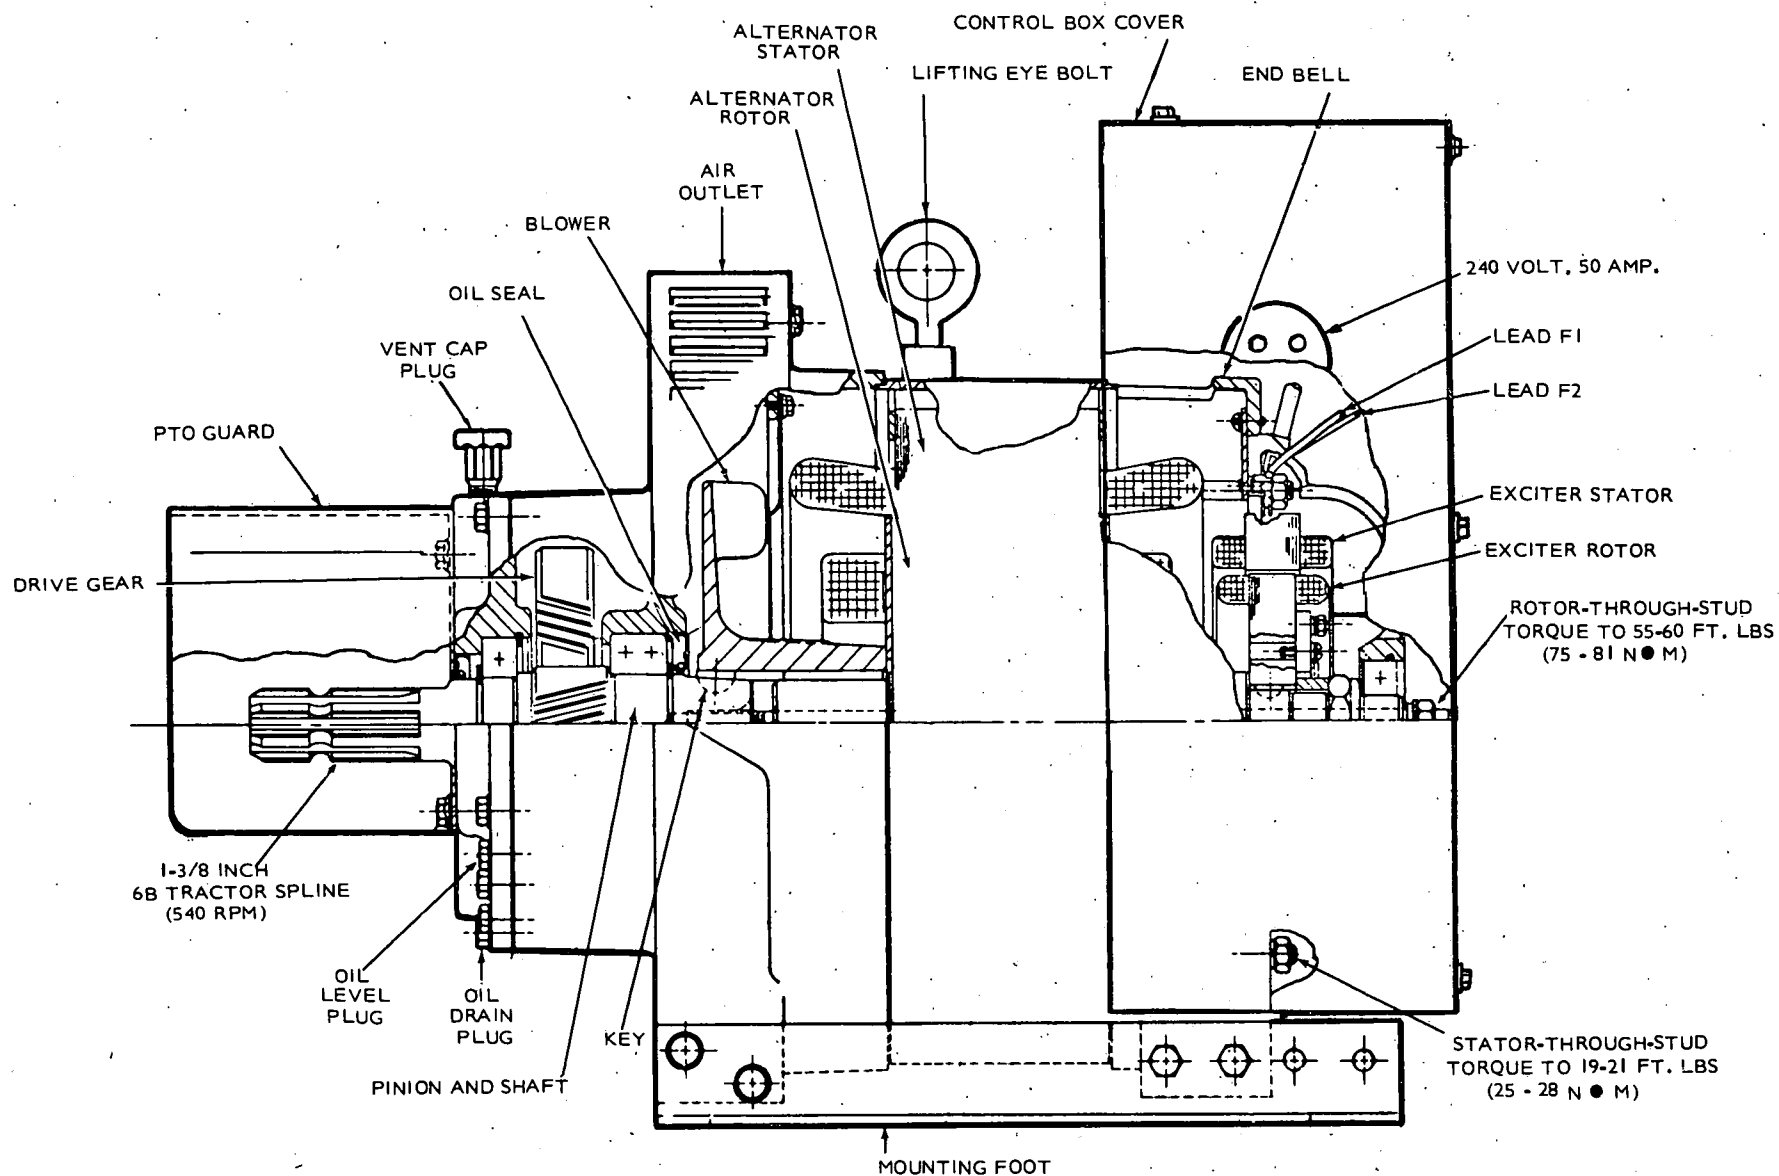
TRACTOR DRIVE ALTERNATOR
